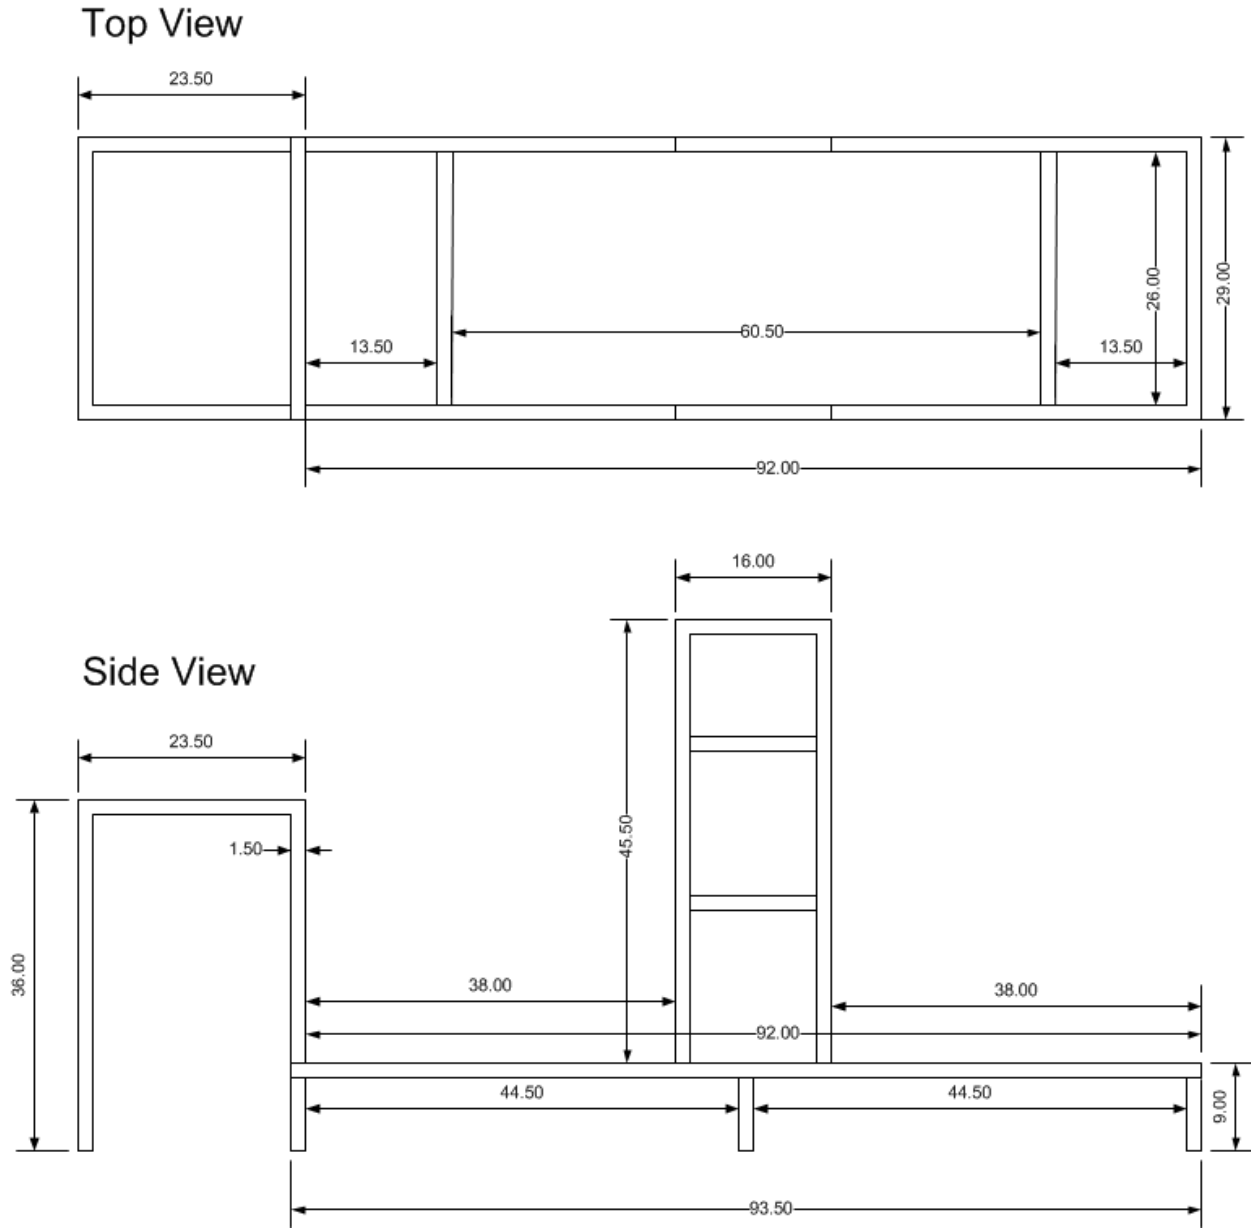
Drawing of the top view and side view of the furnace frame.
